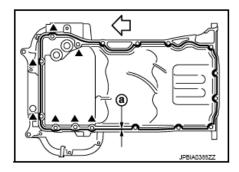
Identifying Liquid Gasket Applying Dimension Of Cylinder Block Mating Surface Of Oil Pan (Upper)
